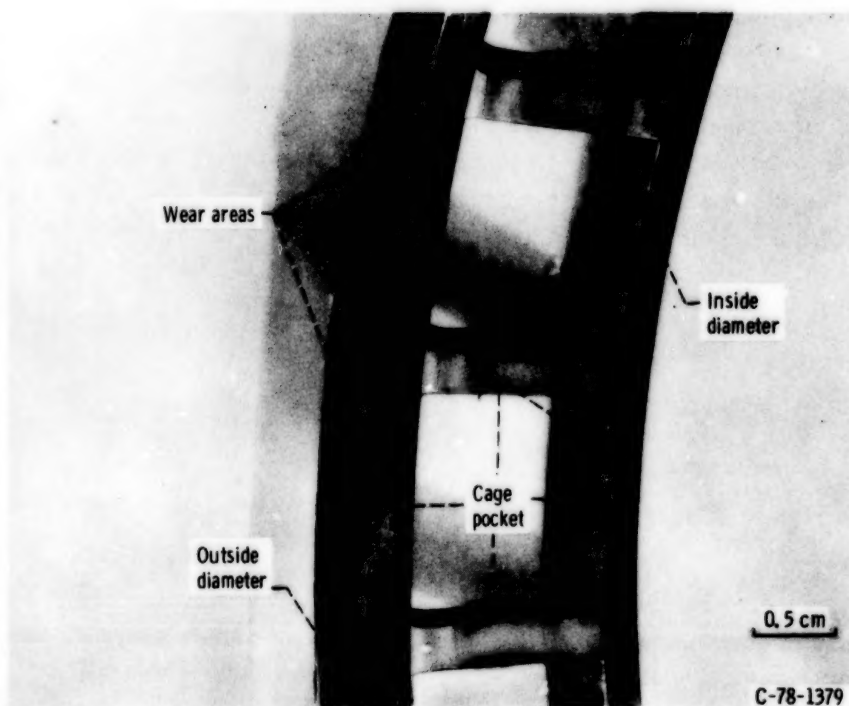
Test-bearing cage after test, indicating areas of wear through silver plate.
